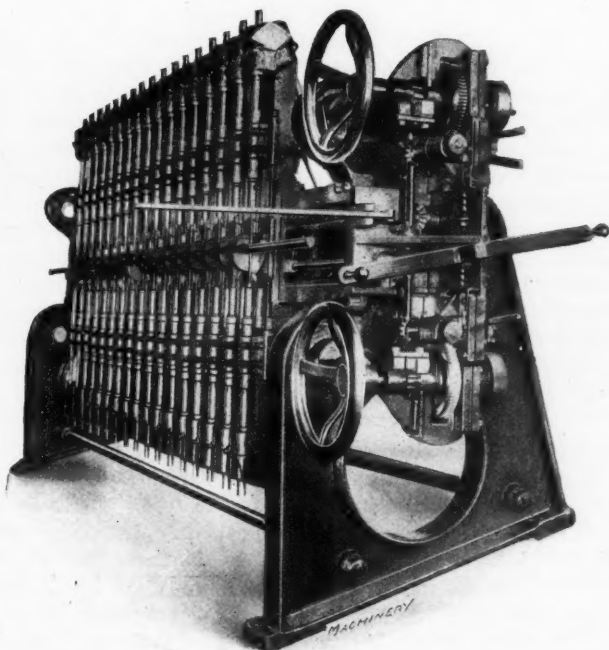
Valley City Multiple Drilling Machine with Thirty-four Spindles
